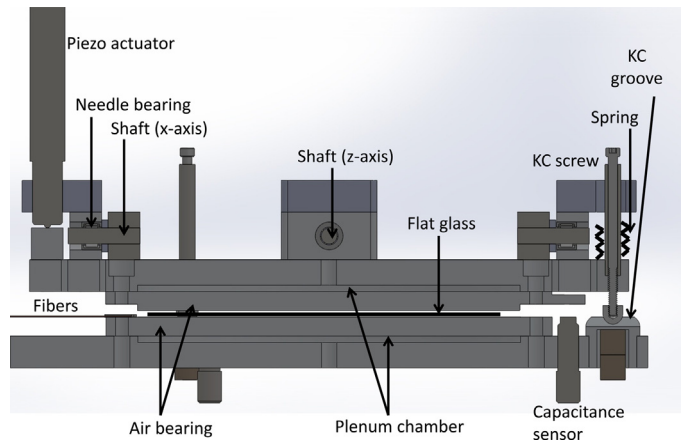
Cross-sectional view of the device in a perfectly stable position.
